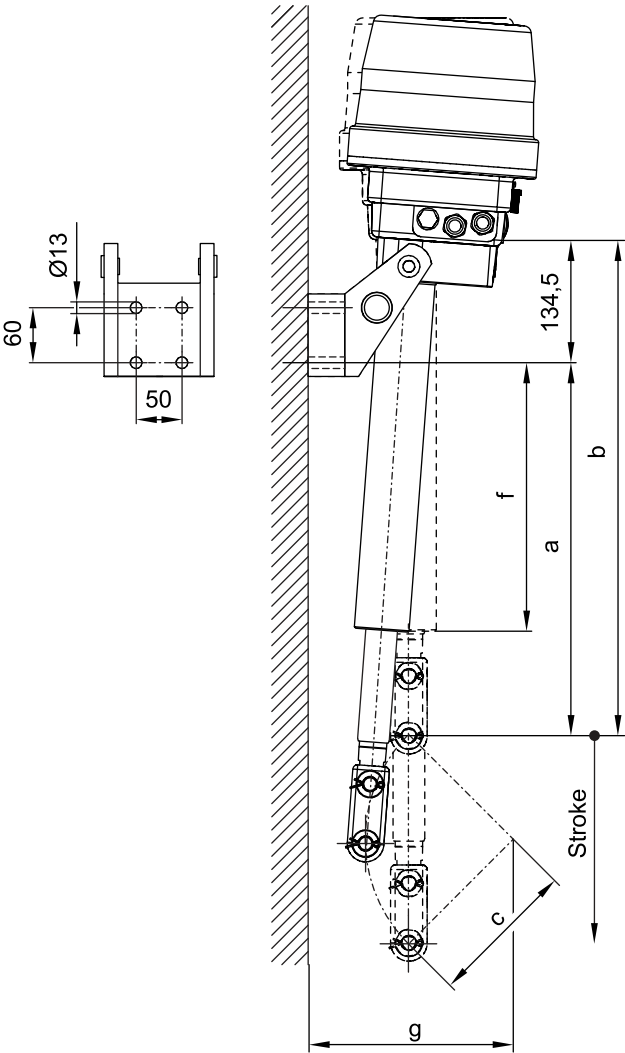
Series NEx-KA – assembly dimensions and radius of motion
